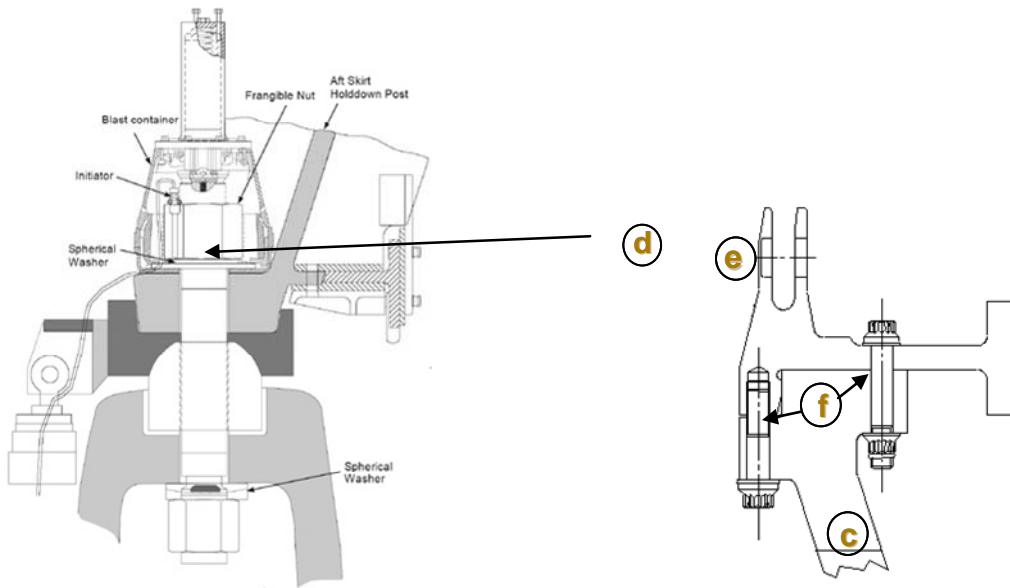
, Left SRB Hold-Down assembly (Left) and Kick Ring assembly (Right)
